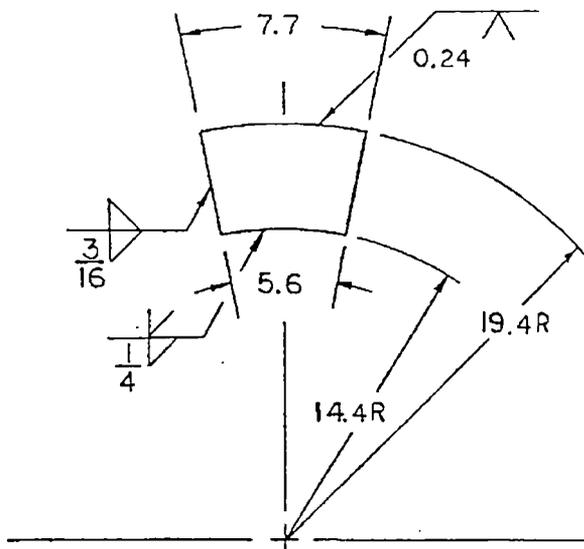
Component Parts of the Expansion Tank Structure
